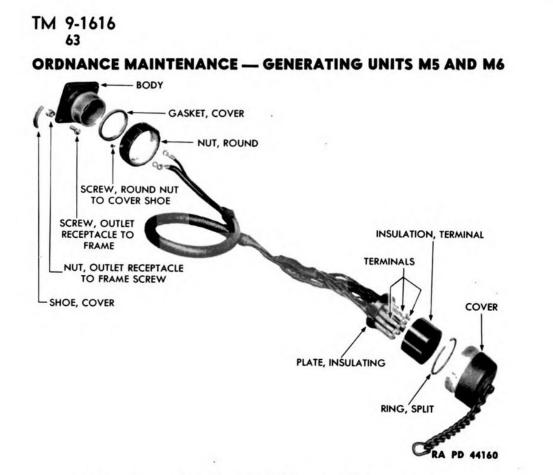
19-pole Outlet Receptacle Assembly — Exploded View
